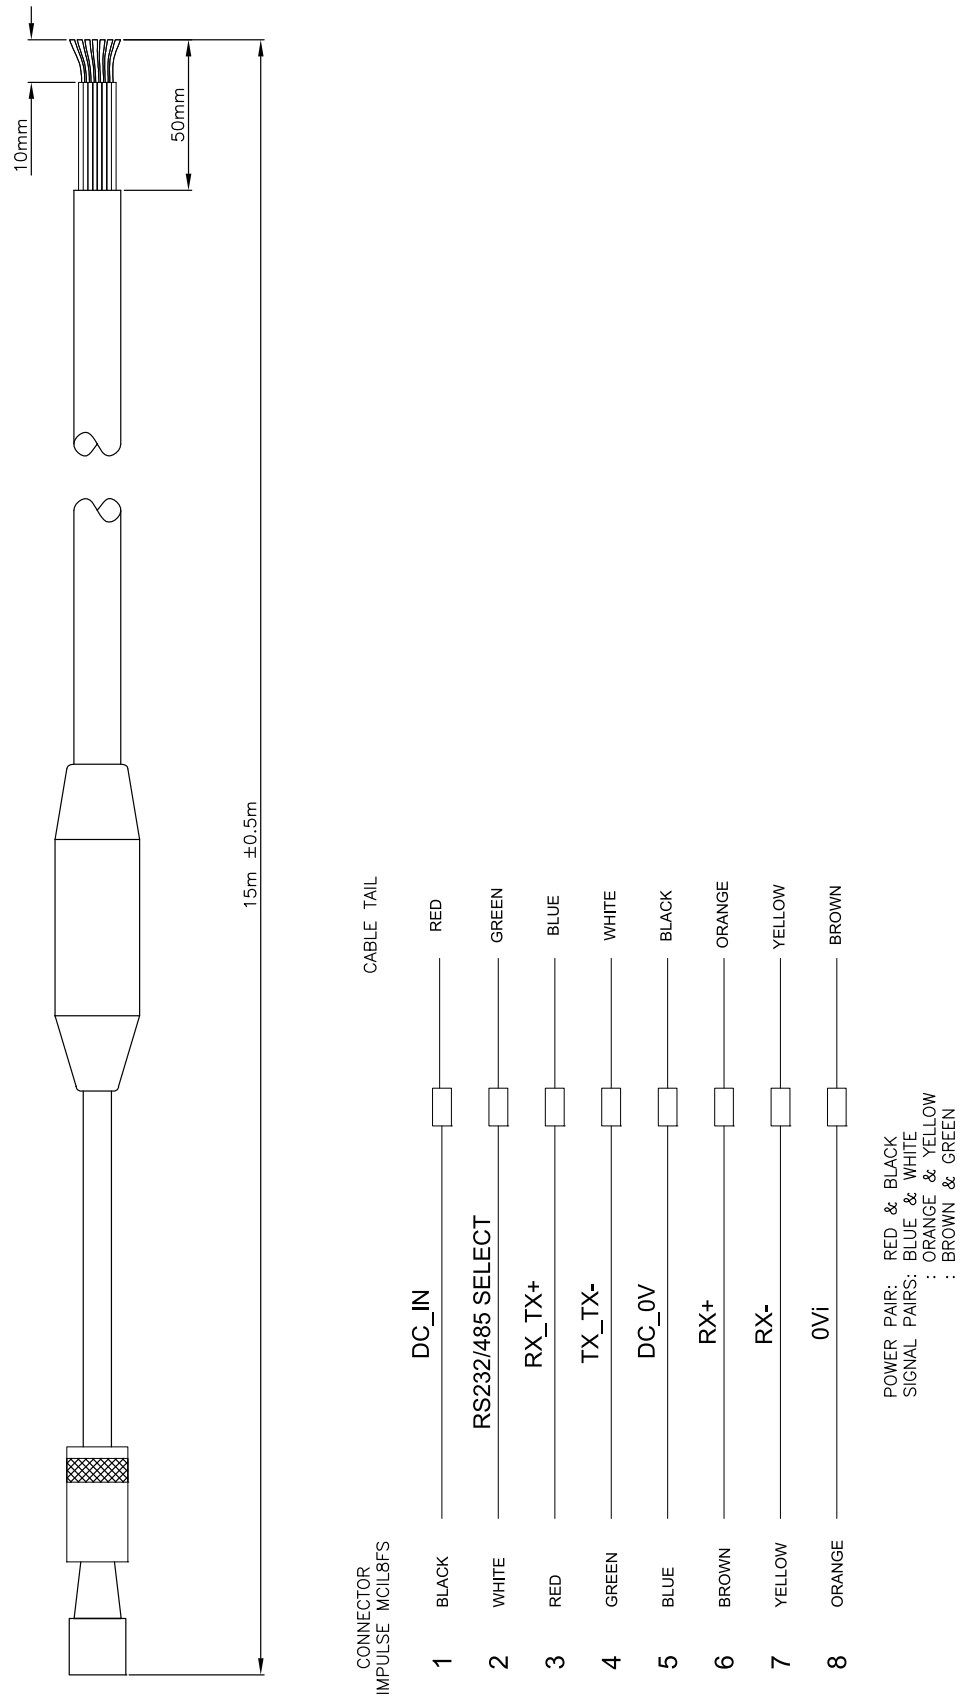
Subsea Lodestar Comms C1 cable assembly – 8084-137-01
